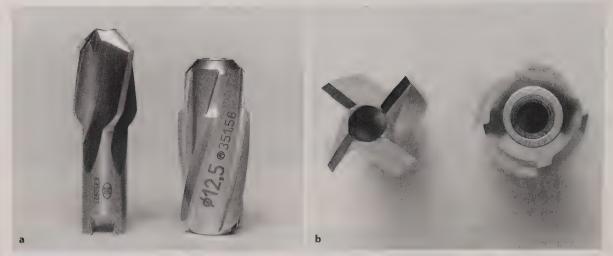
a,b. Side (a) and frontal (b) view of 12.5-mm large fluted reamer head with small core (*left*) and small fluted reamer head with large core (*right*)
